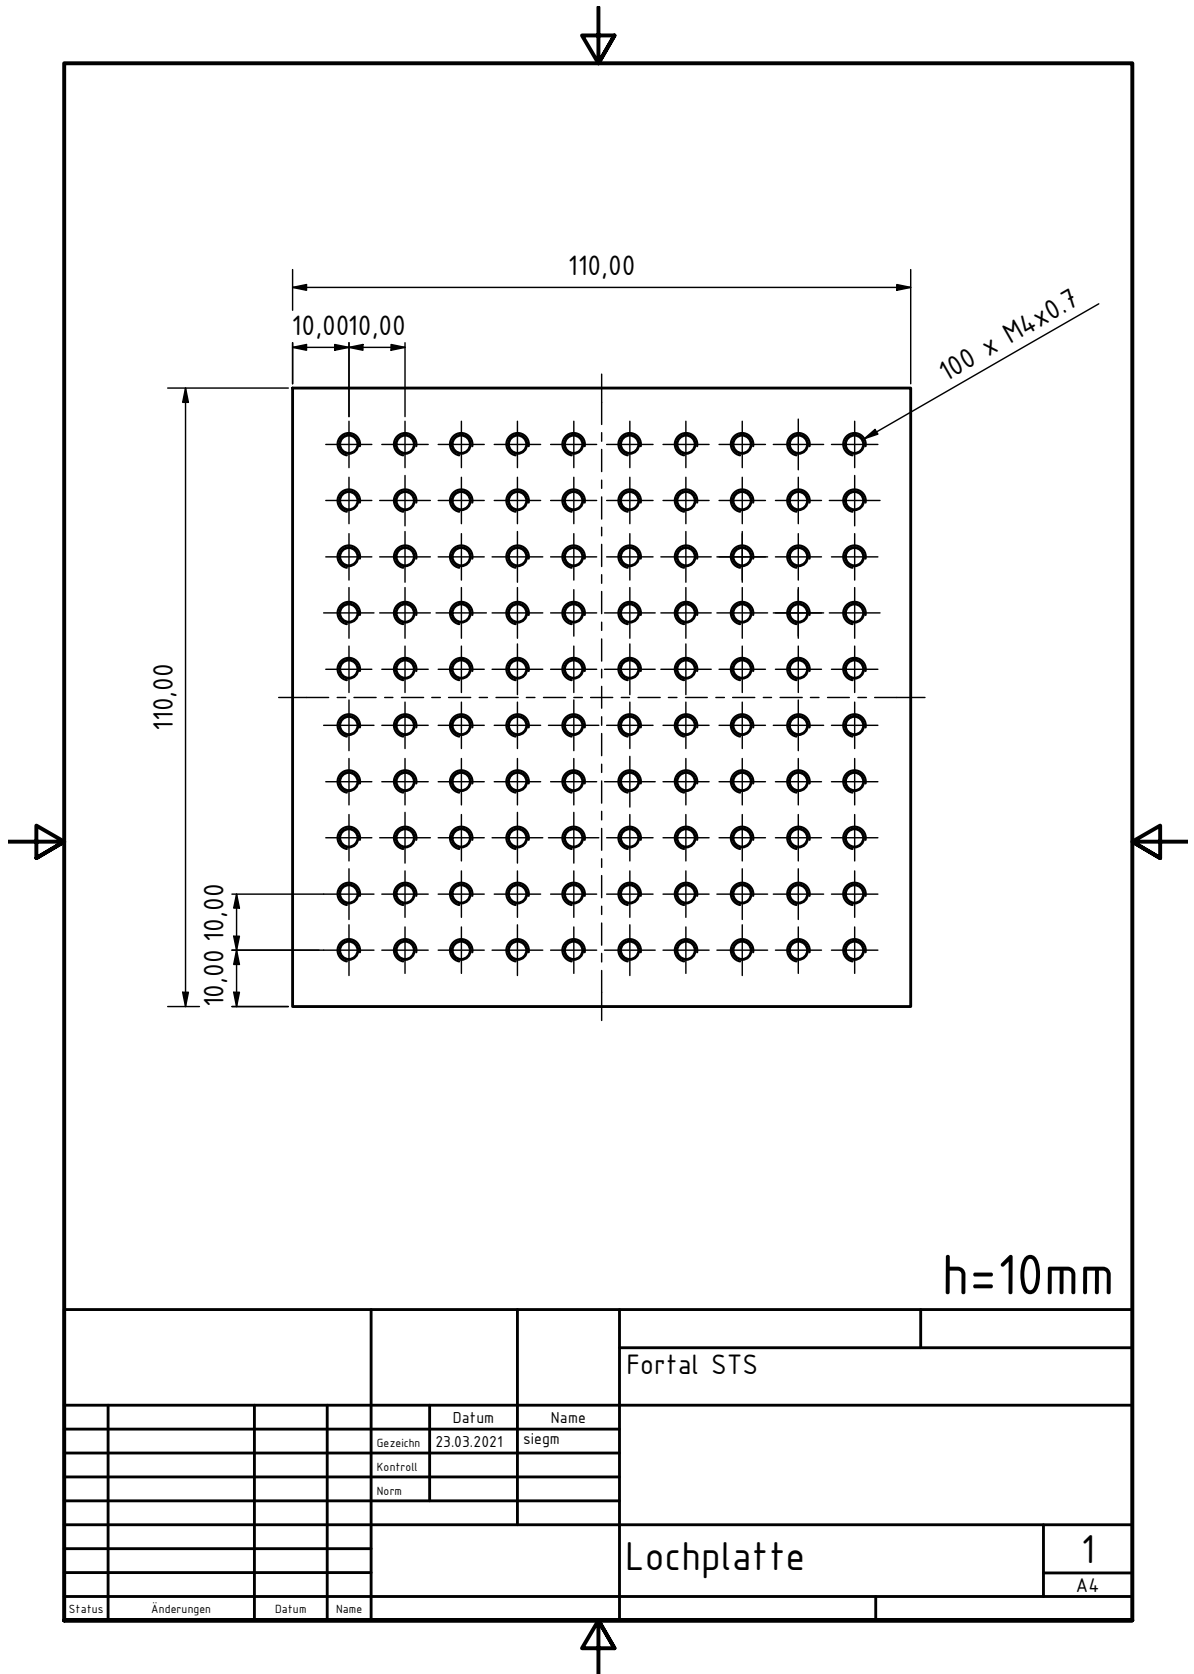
Assembly mechanical drawing - Perforated Fortal STS aluminum plate
